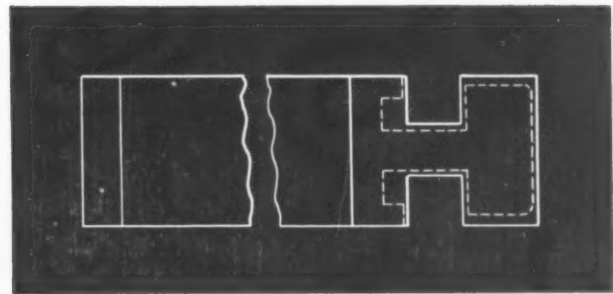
Seven Surfaces on Each Side of a Blade Base, as well as the Bottom Surface of the Base, are Cut in One Broaching Operation
